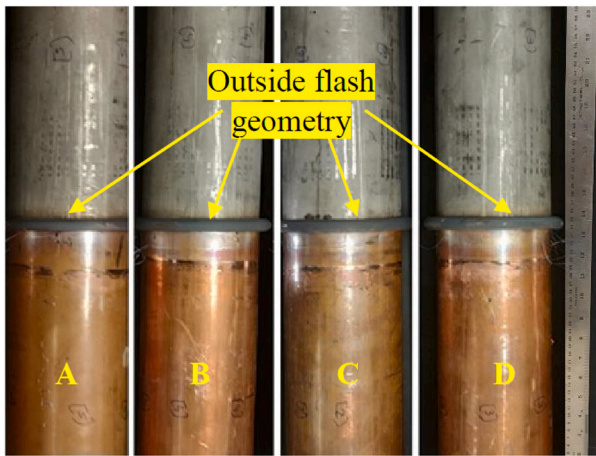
The images of weld surfaces for differently applied weld conditions A, B, C, and D.
